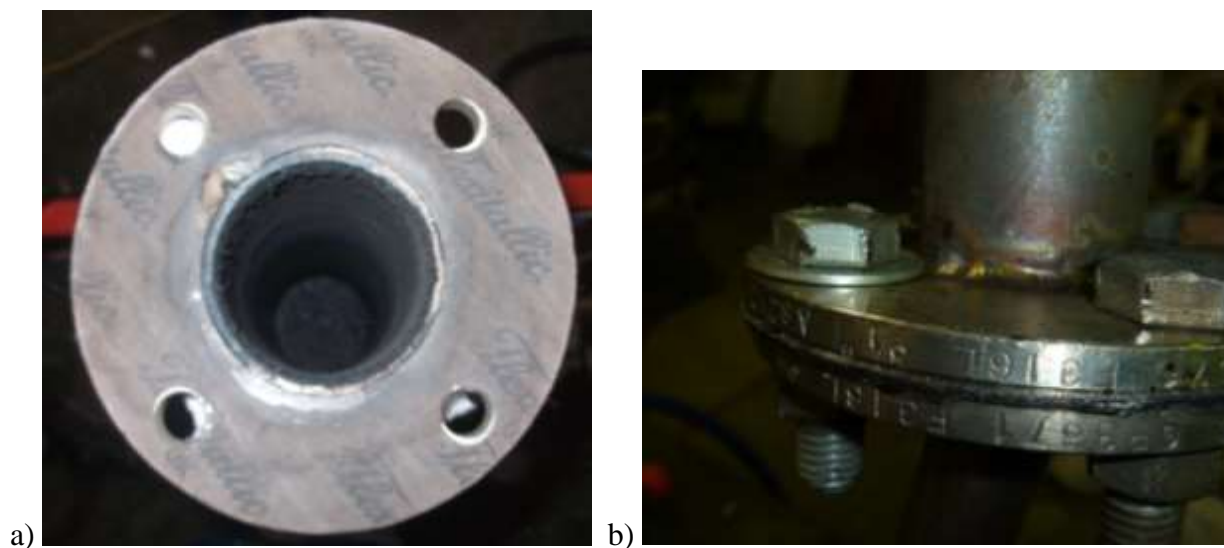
a) An old gasket still on the equipment and b) a New gasket in the joint of the unit.
